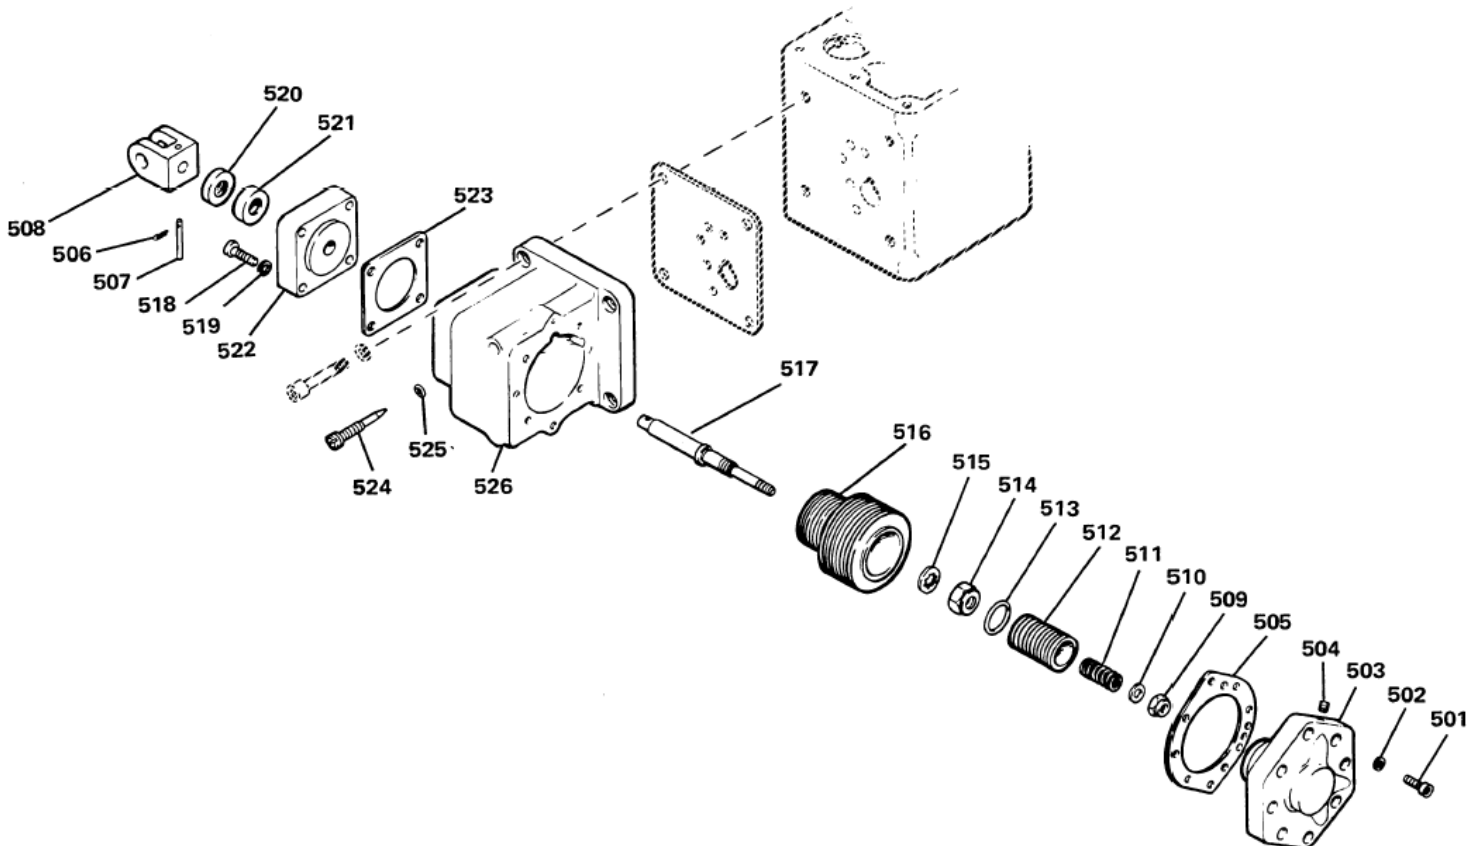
Exploded View of 29 ft-lb (39 J) Differential Power Cylinder
